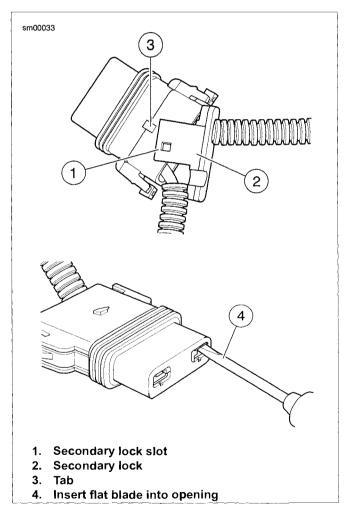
Delphi Main Fuse Housing: Remove Socket Terminals
